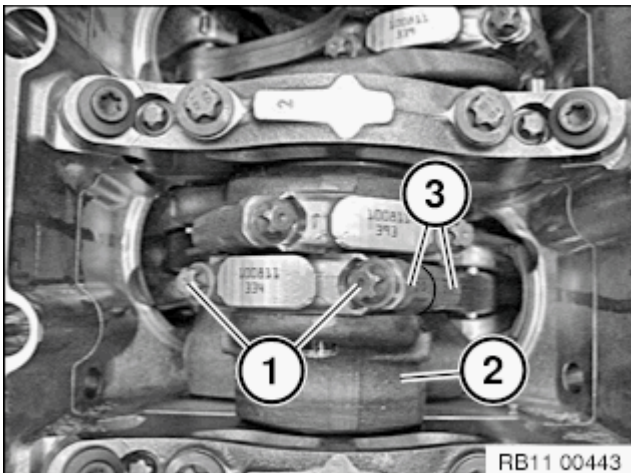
Identifying Connecting Rod Bolts And Crankshaft
